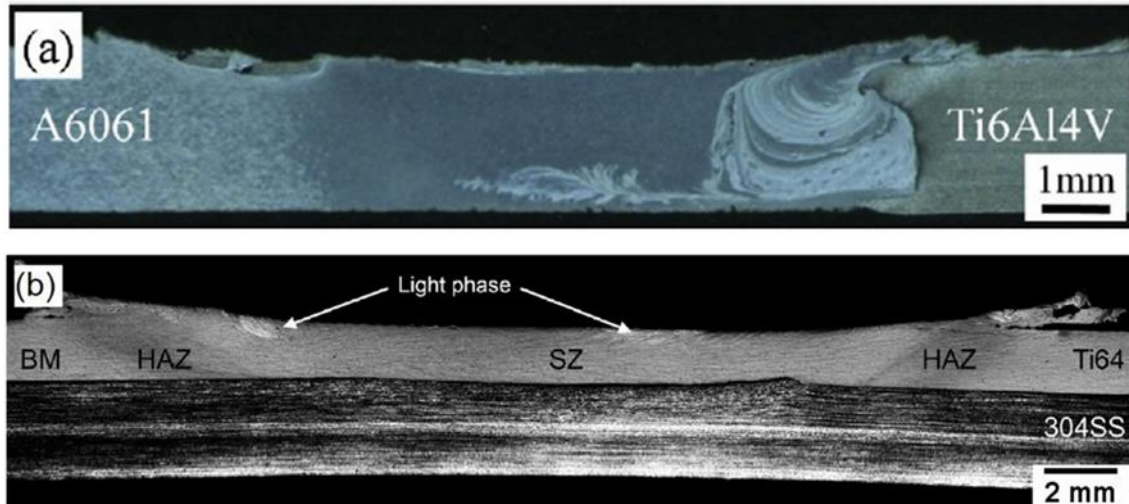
Show different welding position depending on the physical properties of the selected alloys to be joined. a) the Butt welding position to join the Ti alloy to the ductile Al alloy [97] while in b) The lap position was more favourable in the case of joining Ti alloy to 304 stainless steel [94].
